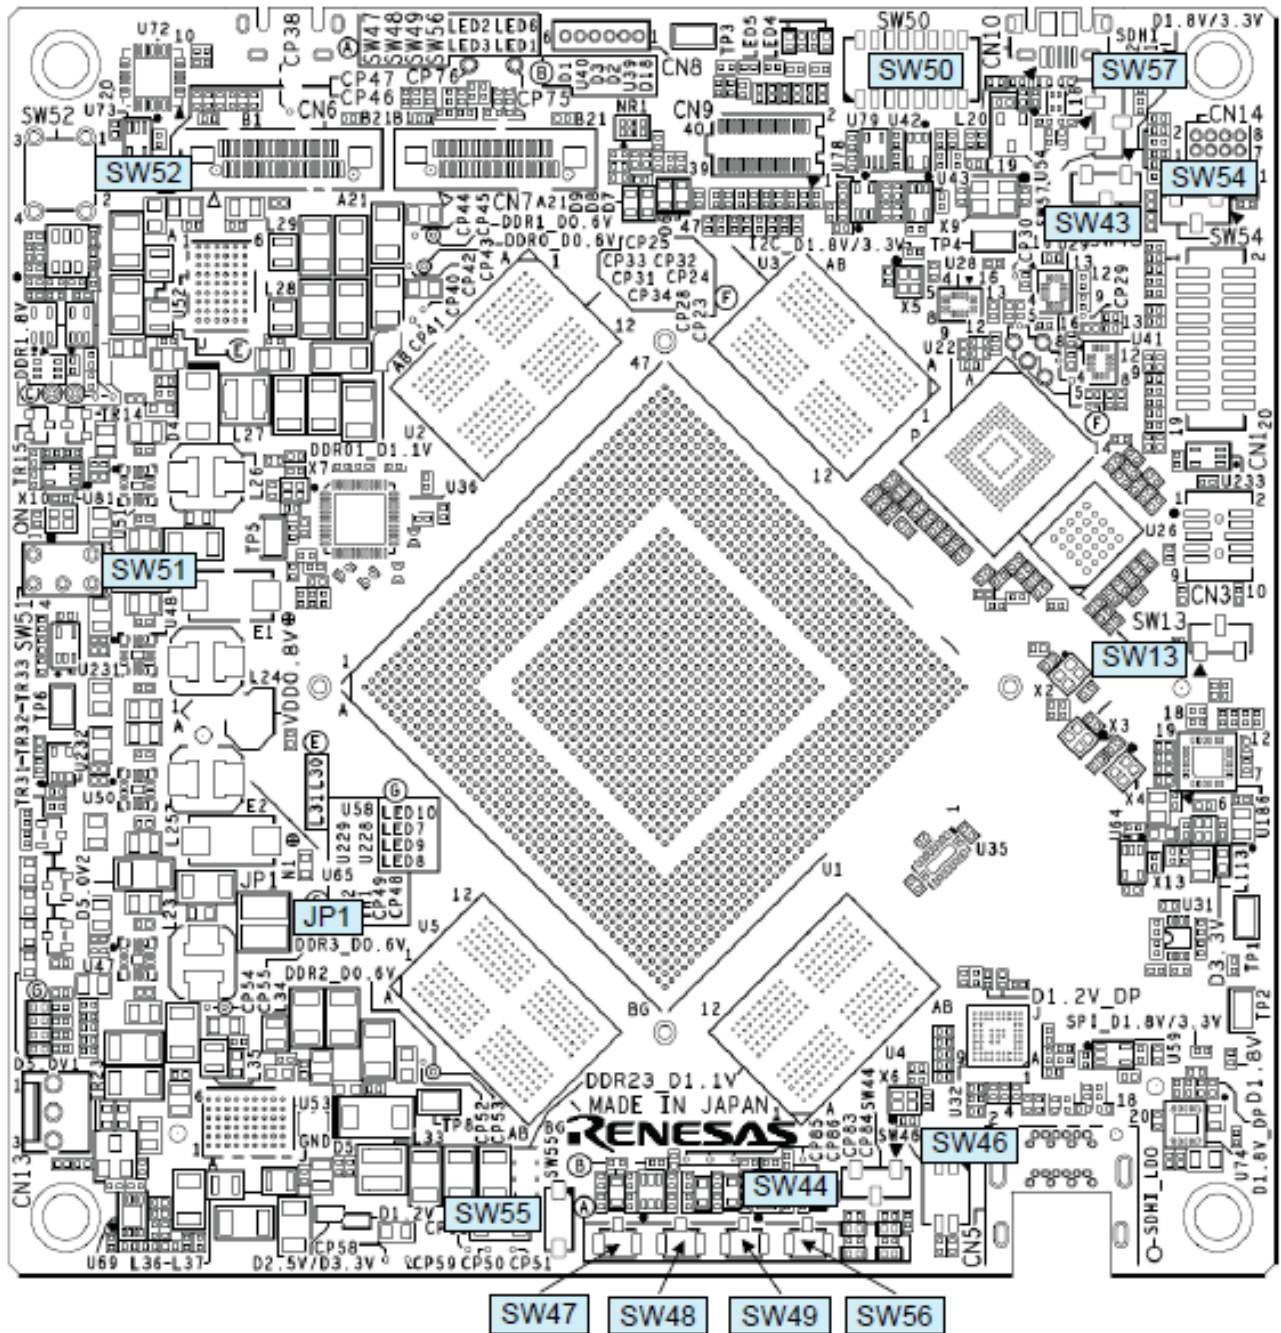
Location of Switches on the Falcon CPU Board (Component Side)
